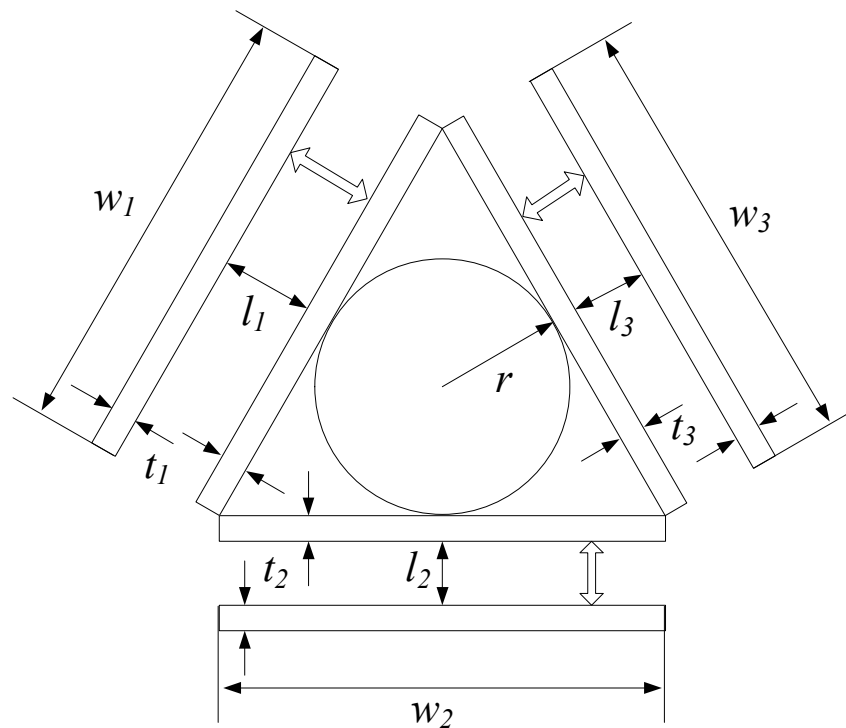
Schematic cross-sectional view of three-finger gripper.
